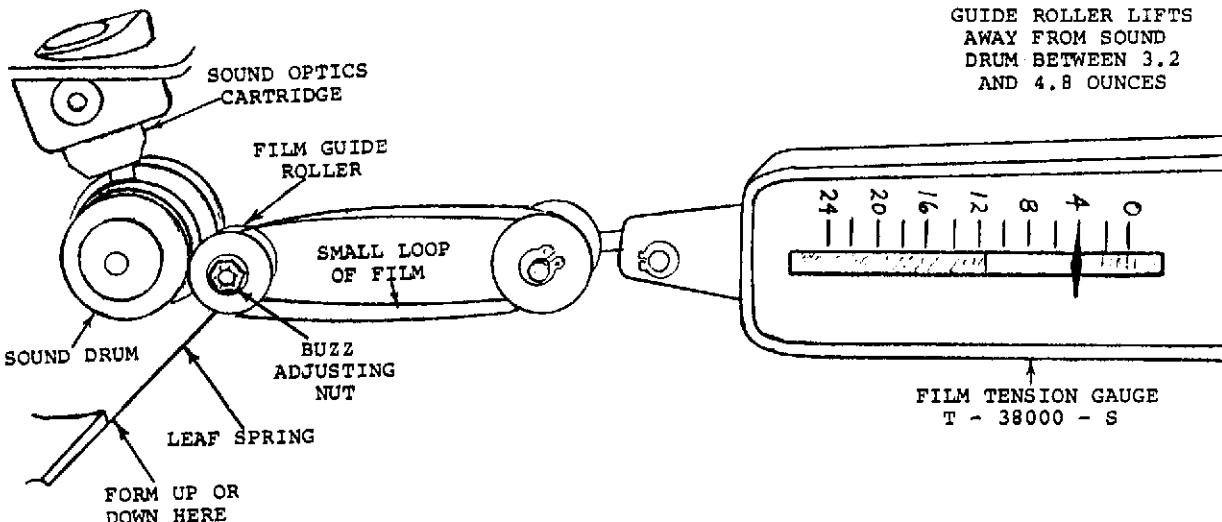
PRESSURE ROLLER ARM ADJUSTMENT
